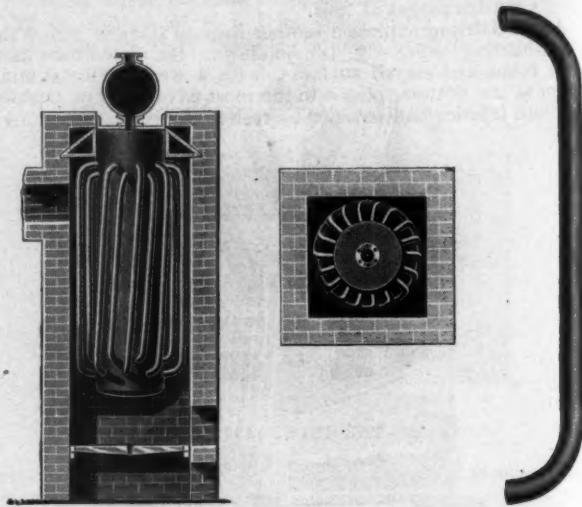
THE ROGERS & BLACK BOILER, 1876.
